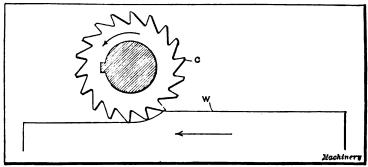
End View of Cylindrical Cutter Milling Flat Surface
